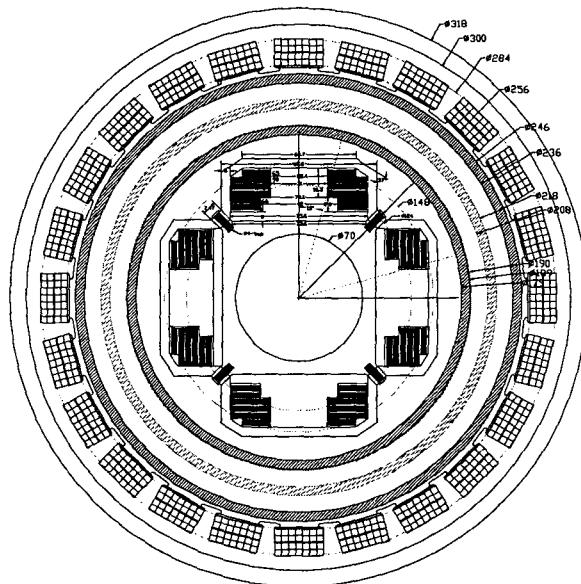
Designed Cross-section of 3kW HTS Synchronous Machine(mm dimensions)
